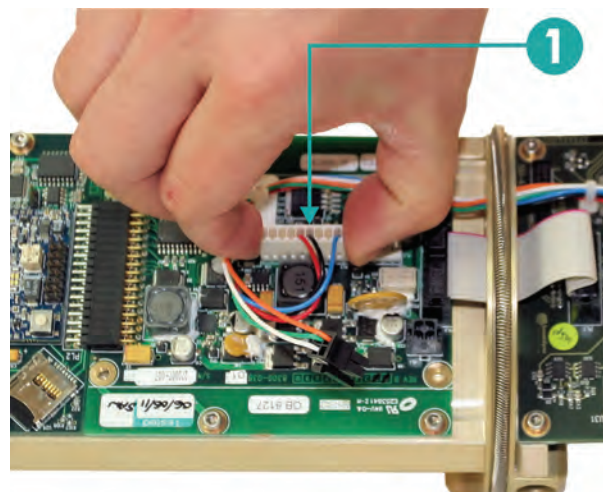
Disconnecting PL1 Connection from the Interface PCB Assembly
